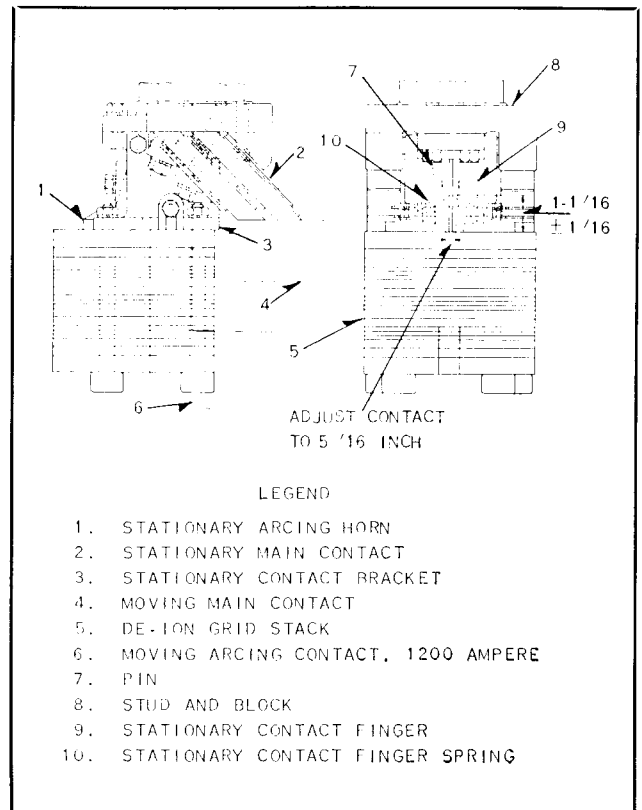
"De-ion Grid" Contact Assembly, 2,000-Ampere
